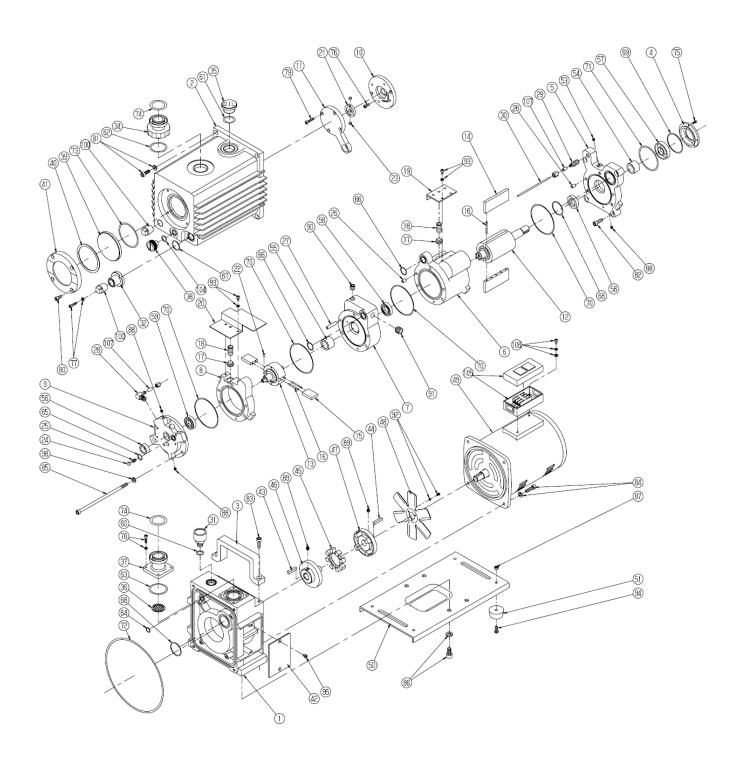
Disassembly drawing of GCD-201X oil sealed rotary vacuum pump
